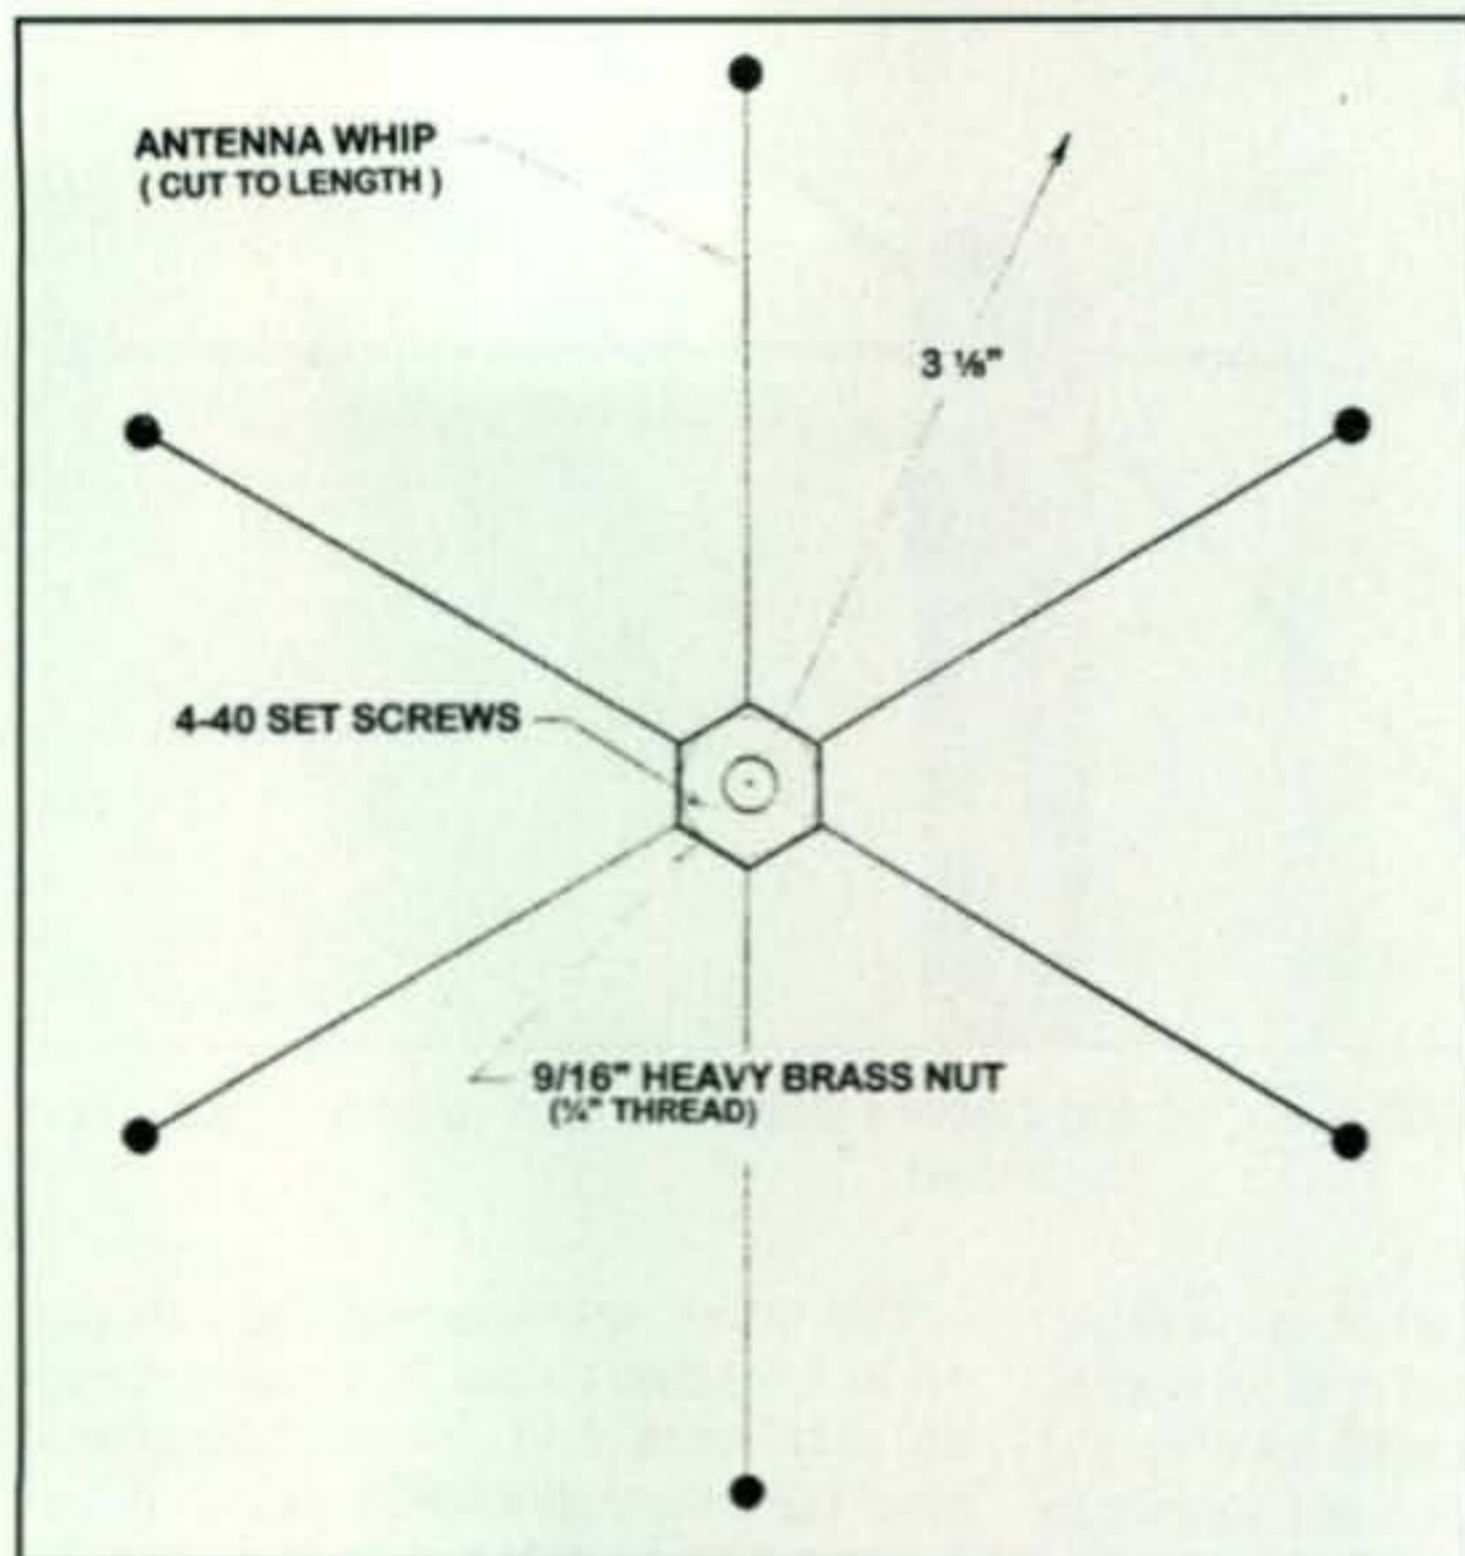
Detail of the top hat for the elevated ground-plane antenna.
